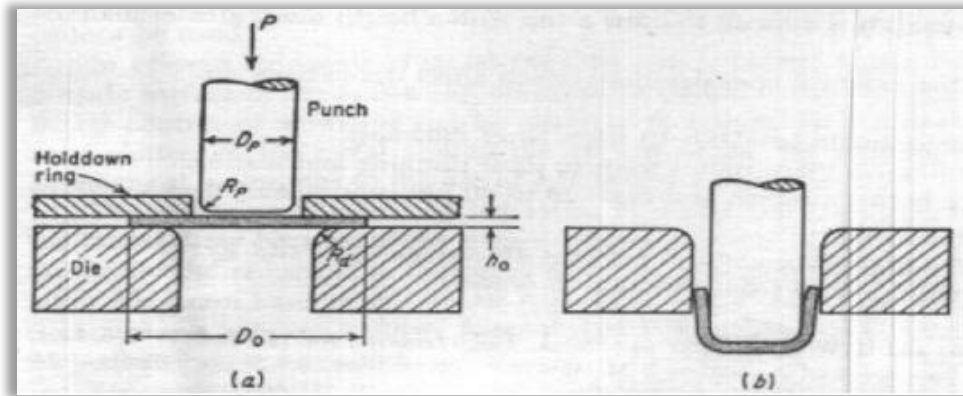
Deep drawing of a cylindrical cup (a) before drawing and (b) after drawing [7].
